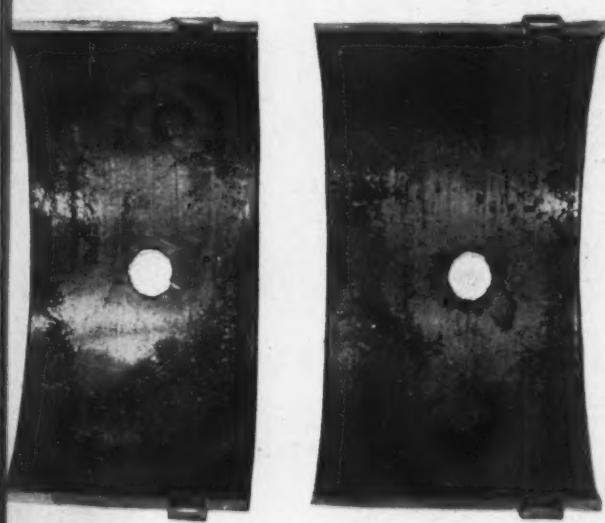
Acidic lubricating oil caused the corrosion of this copper-lead bearing
